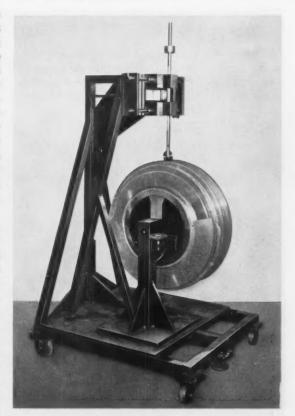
Final cam inspection of the assembled spiral cam drum is accomplished with the equipment shown.
